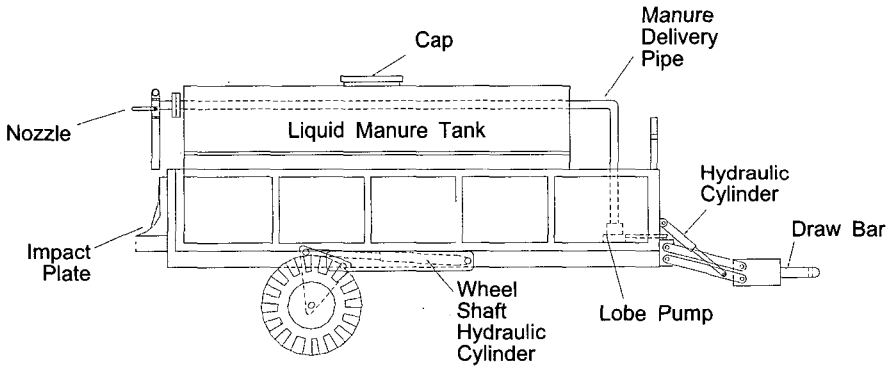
Wheel axle height adjustable type liquid manure spreader.
